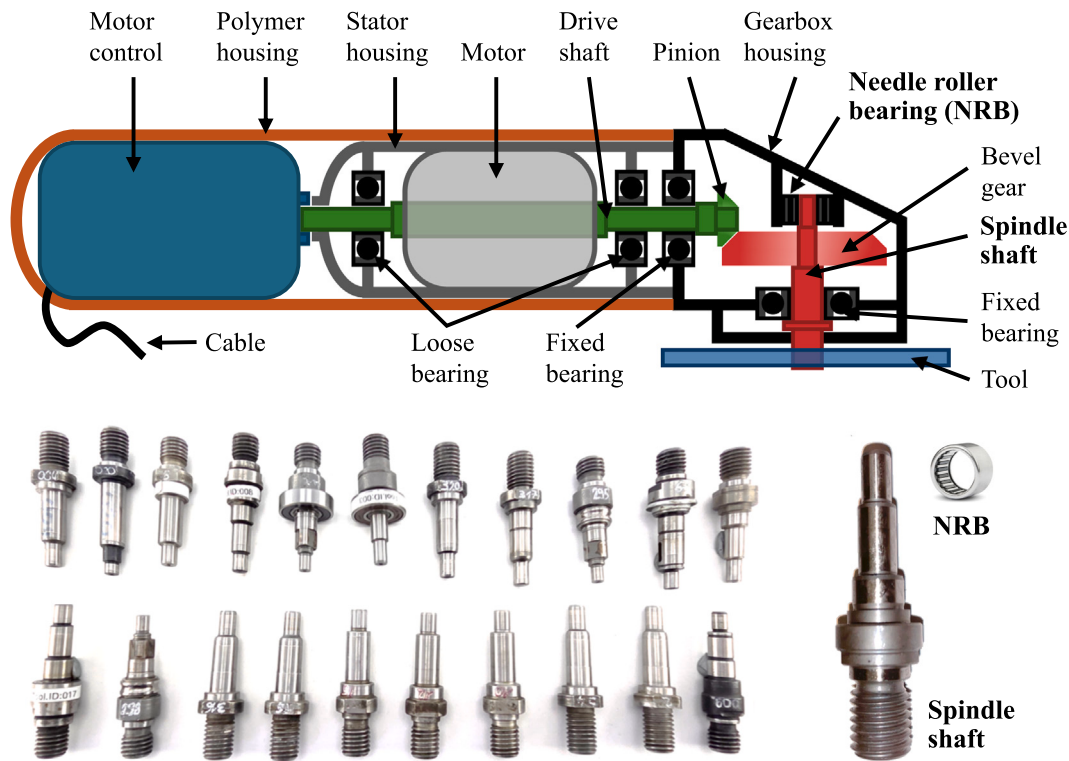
Principal sketch of the *Fein CG15-125BL* angle grinder based on [52], showing the product structure with relevant components (top). The bottom view details the spindle shaft, needle roller bearing (NRB), and the full set of analyzed spindle shafts.
